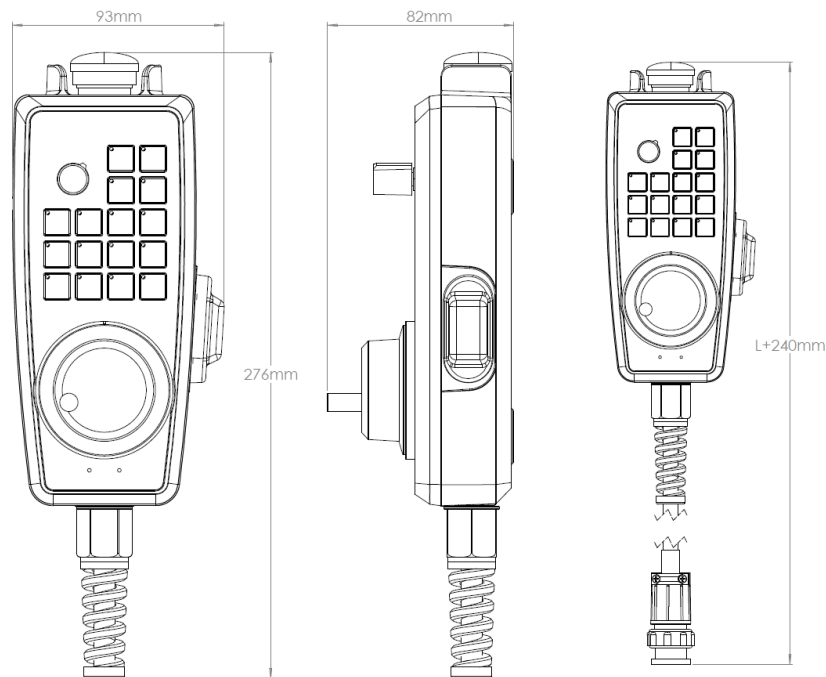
Remote Pendant Standard Dimensions (mm)
